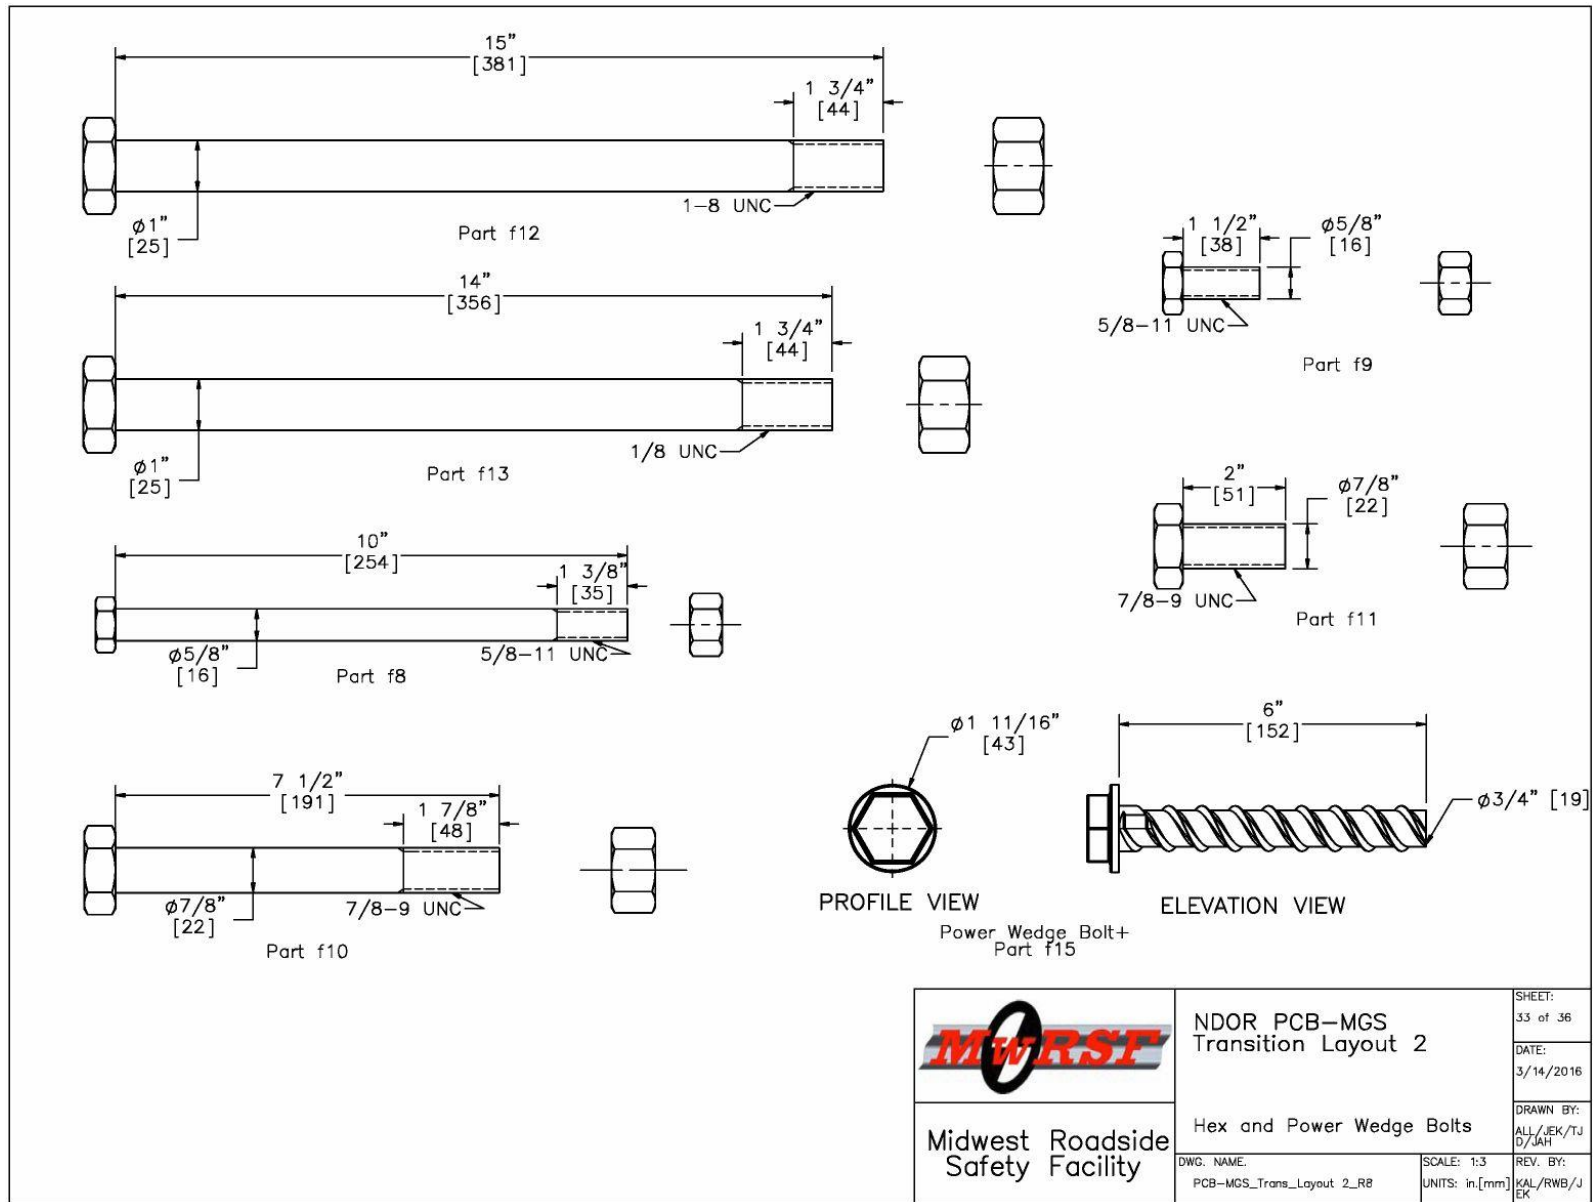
Hex and Power Wedge Bolts, Test No. MGSPCB-1
